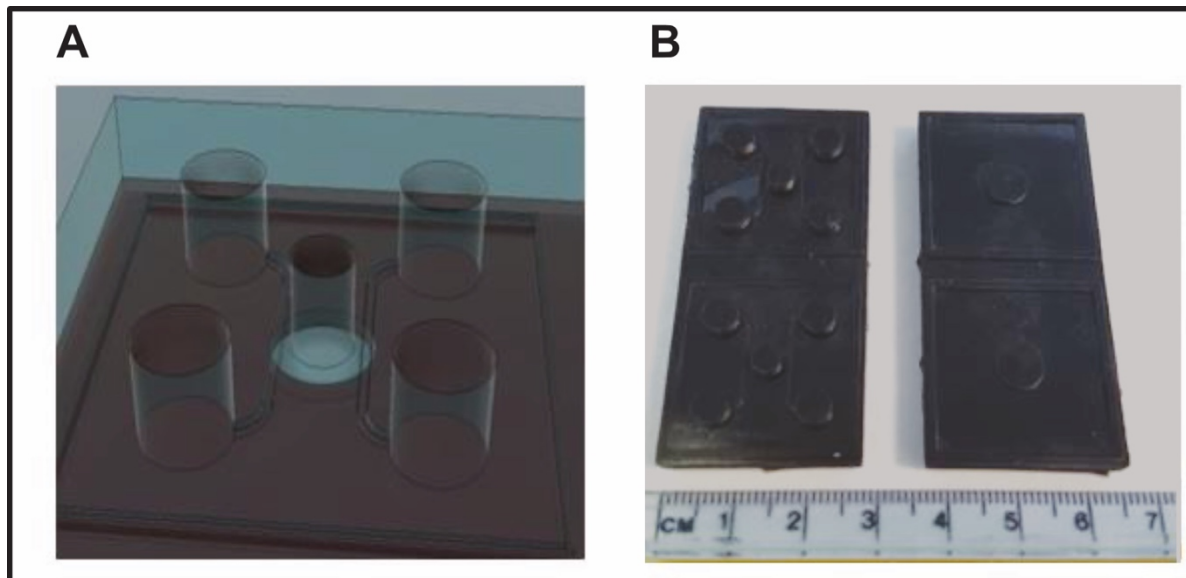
Computer assisted design and 3D printing as an alternative to traditional LOC fabrication. A) Picture of the design of a LOC device used in this study. B) 3D printed moulds using black resin. The right mould corresponds to the bottom layer of the LOC and the left one to the top layer of the chip.
